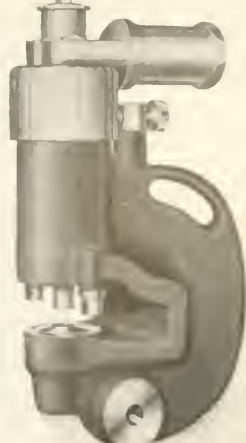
Whitney No. 40 Ball Bearing Punch for Sheet Iron up to $\frac{3}{4}$ Inch in Thickness
